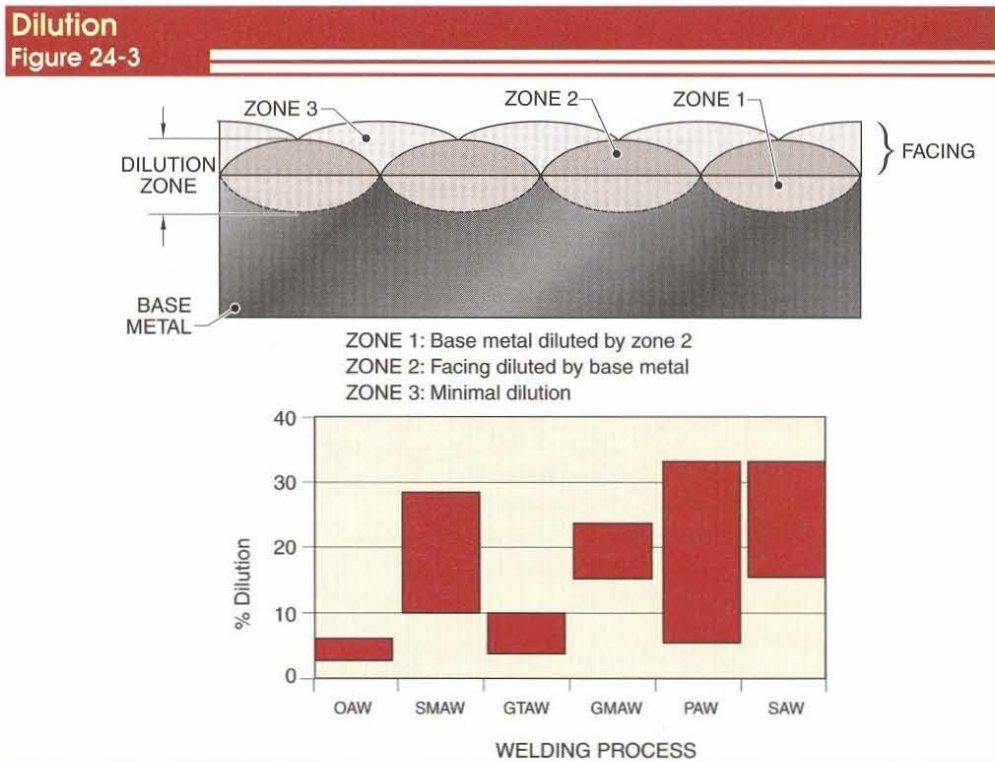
Dilution varies with the type of welding process used for surfacing.
